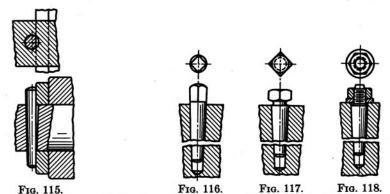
Here the pin is flattened off and used as a wedge. This method calls for accurate work, but, if the hole is reamed too large or wears too much, the next larger taper pin may be used.
